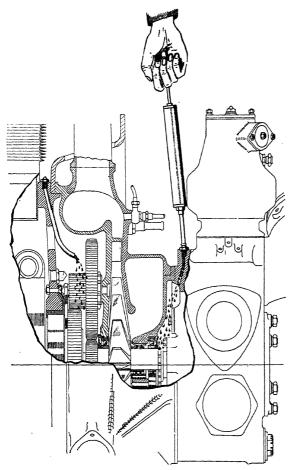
OIL PRIMING OF BLOWER BEARINGS AND GEARS.
